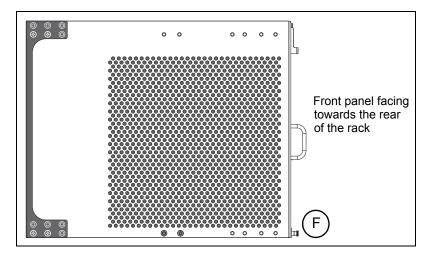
Rack Bracket Locations for Reverse Position of Chassis
